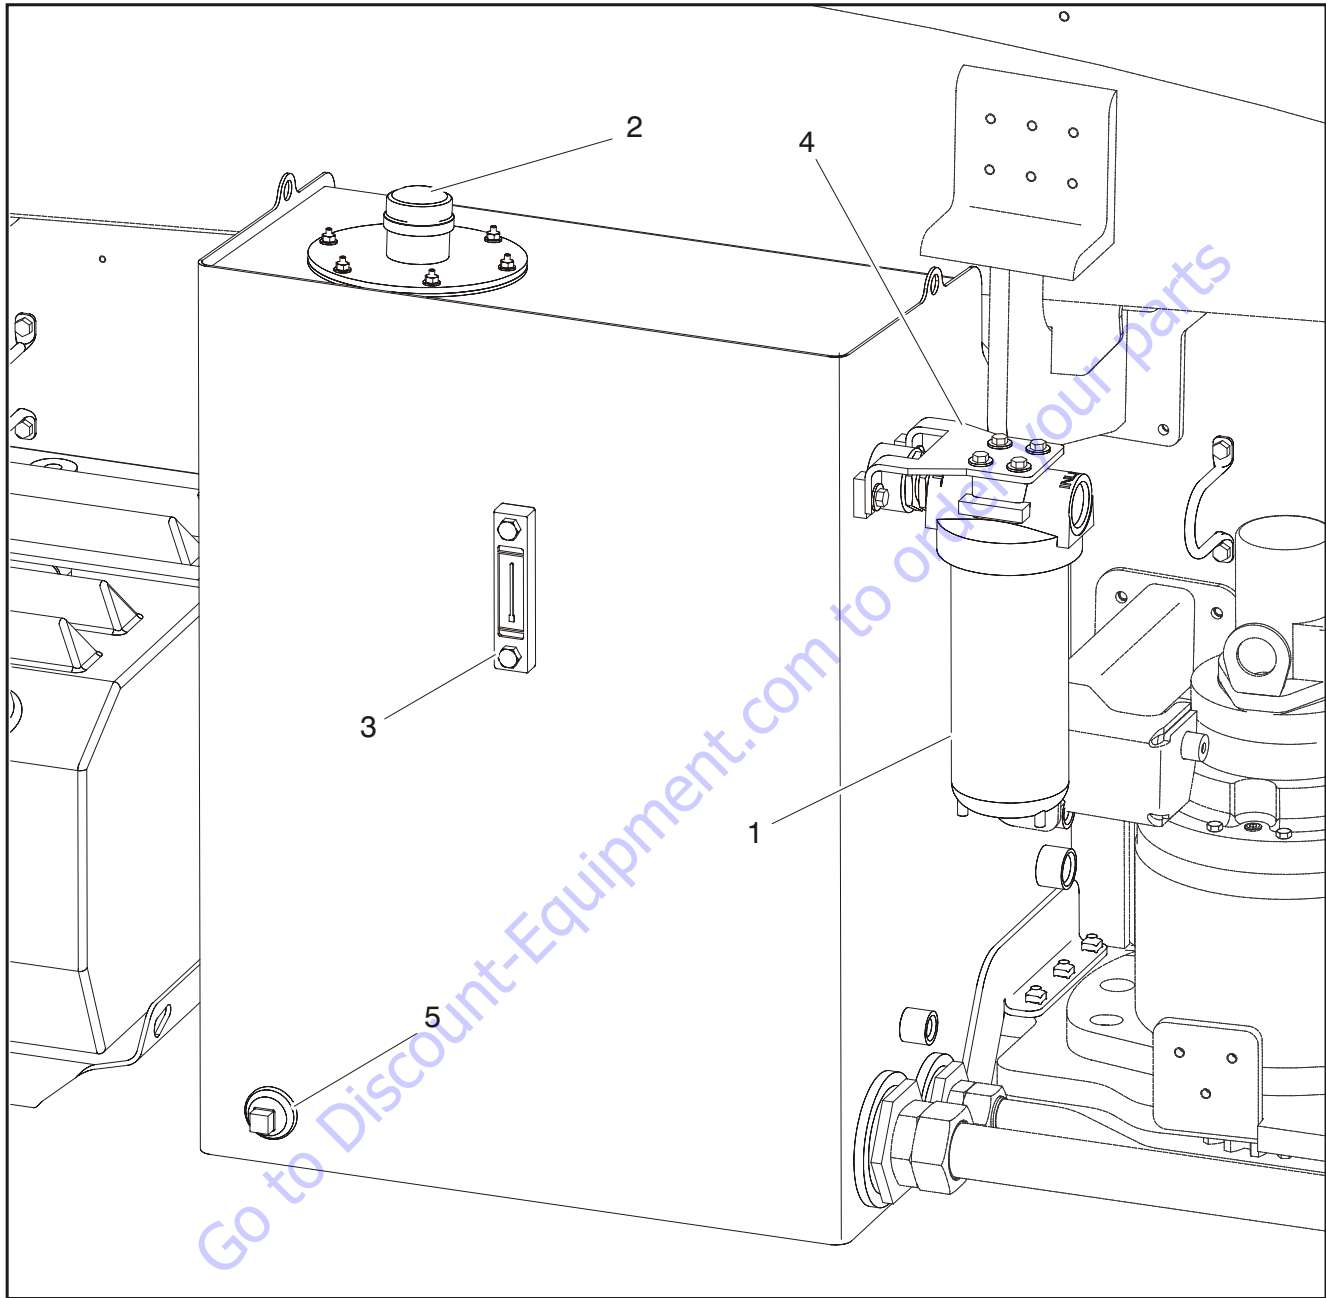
Hydraulic Return Filter Condition Indicator - Prior to SN 139396
